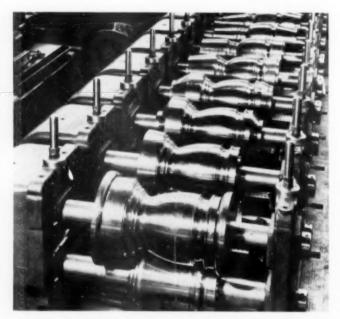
This standard-size roll forming machine is set up for forming the sides and ends of burial caskets.
